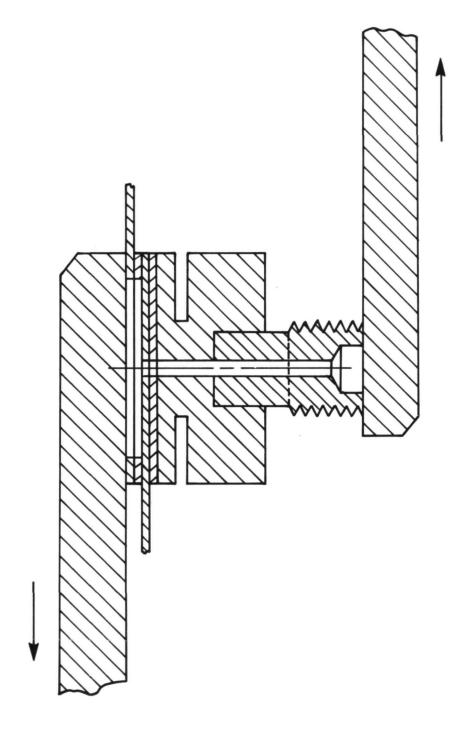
Two Piece T- Mount Stud - Cold Stack Design (Copper T - Steel Screw)
